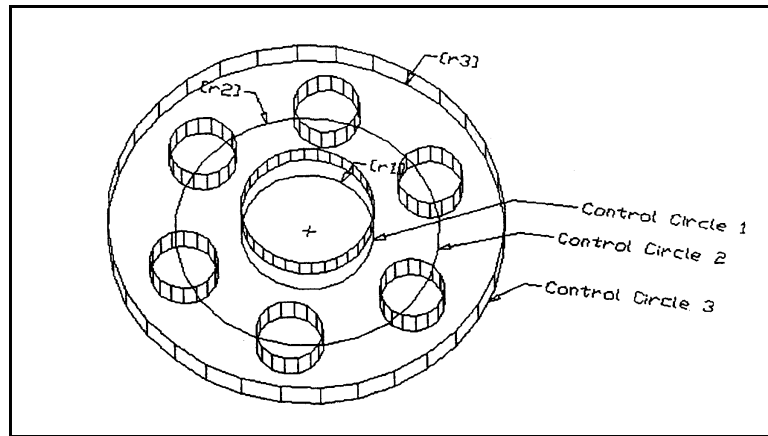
RADIALLY DIMENSION THE CONTROL CIRCLES
